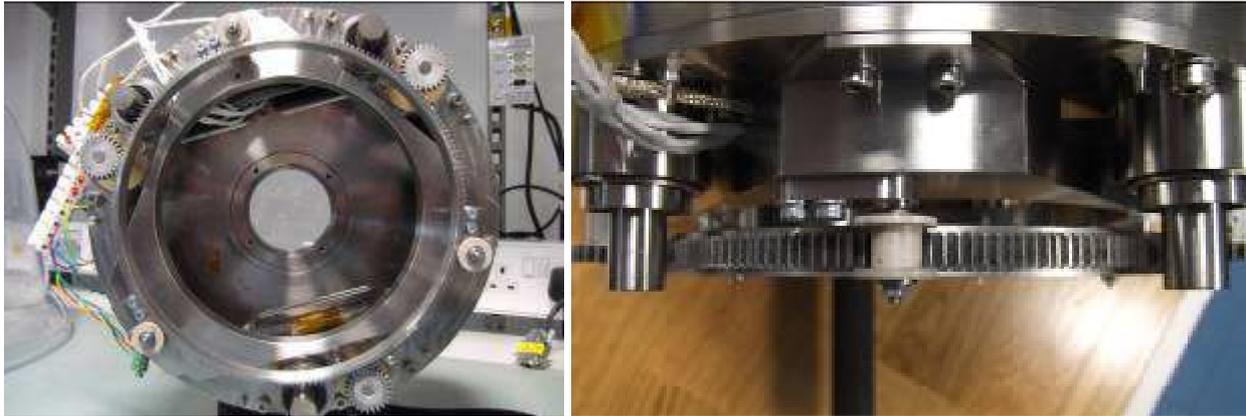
Guide Roller Module Installed on EM Focus Mechanism
